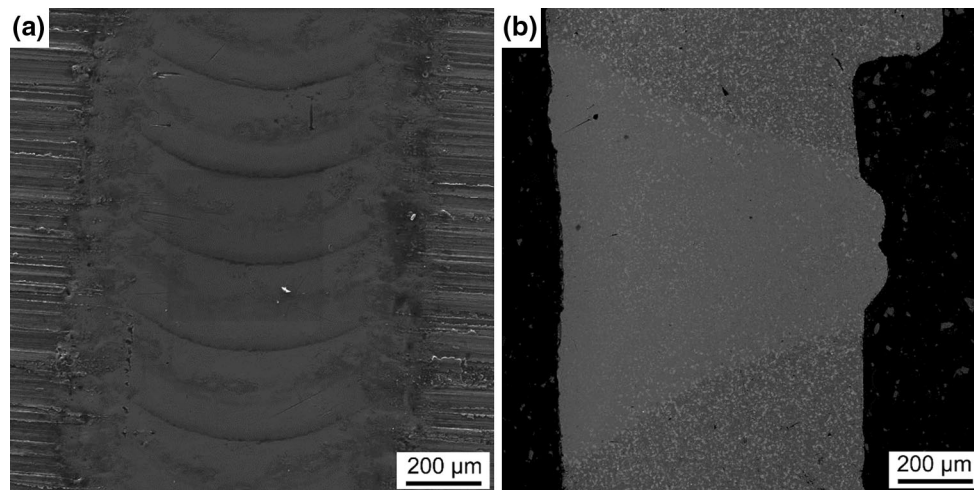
Surface appearance (a) and cross-sectional microstructure (b) of the Al/50Sip composite joined by laser welding
